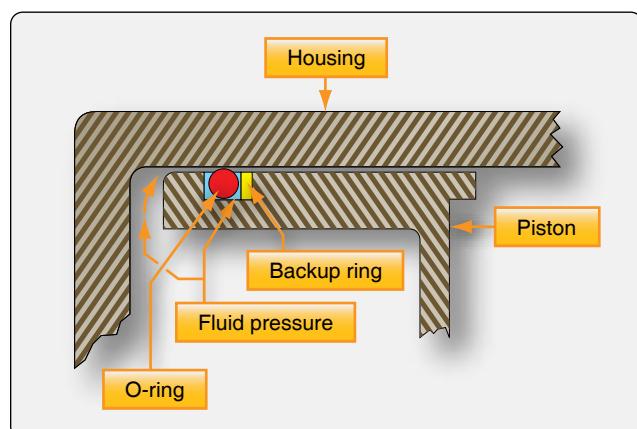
Back-up rings are used to keep O-rings from extruding into the space between the piston and the cylinder. They are positioned on the side of the O-ring away from the fluid pressure.
